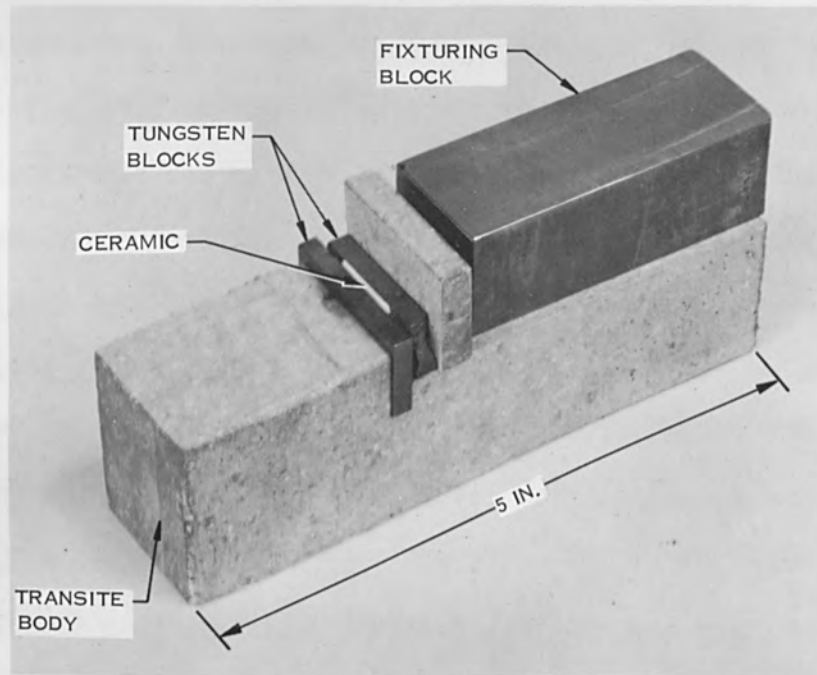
Fixture for Electron Beam Preheating of Al_2O_3
